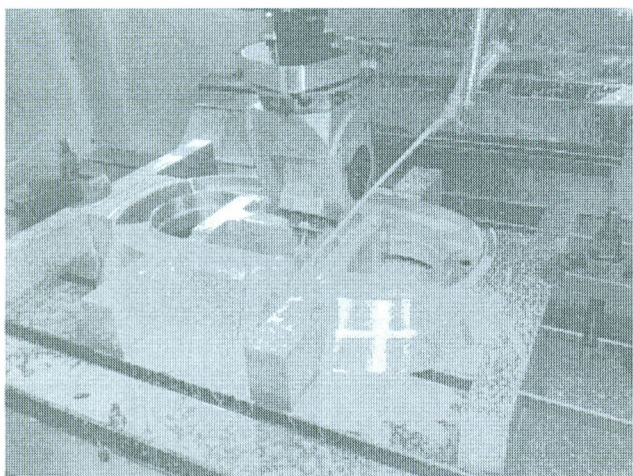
Positional five axis machining of a typical aircraft component having closed walls machined on three axes CNC Vertical Machining Center using the angular head.
